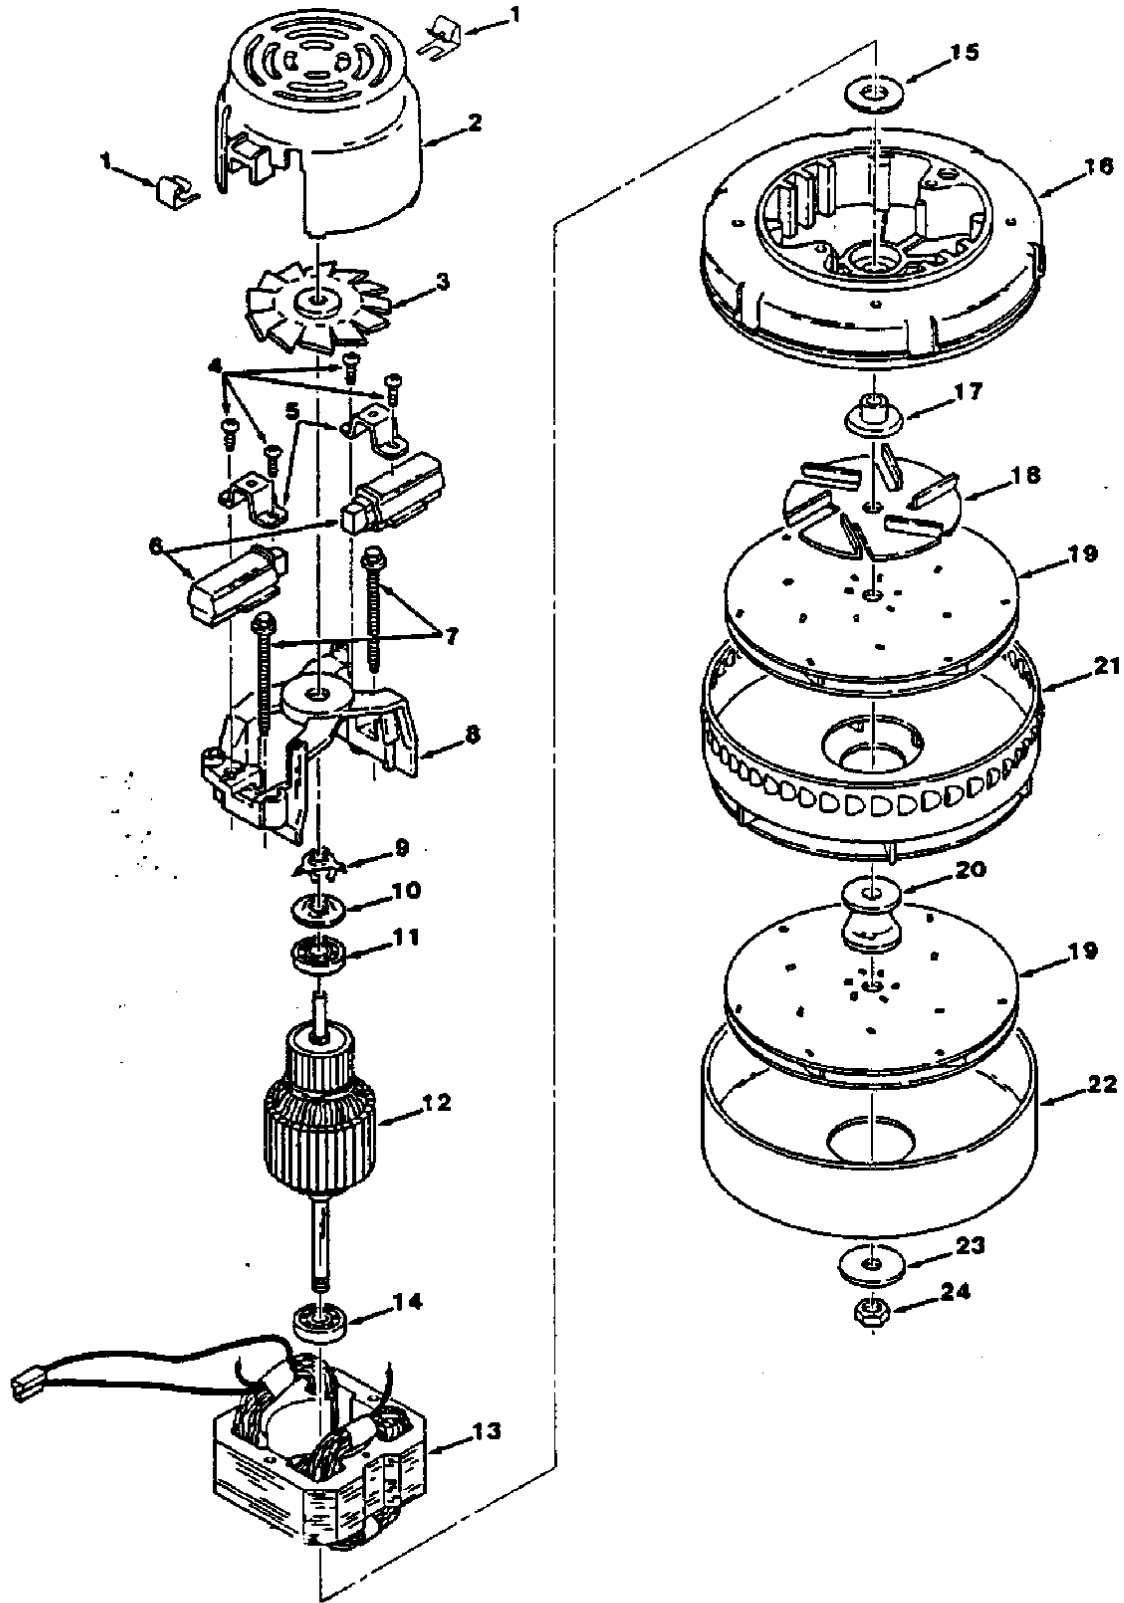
VACUUM FAN MOTOR BREAKDOWN
